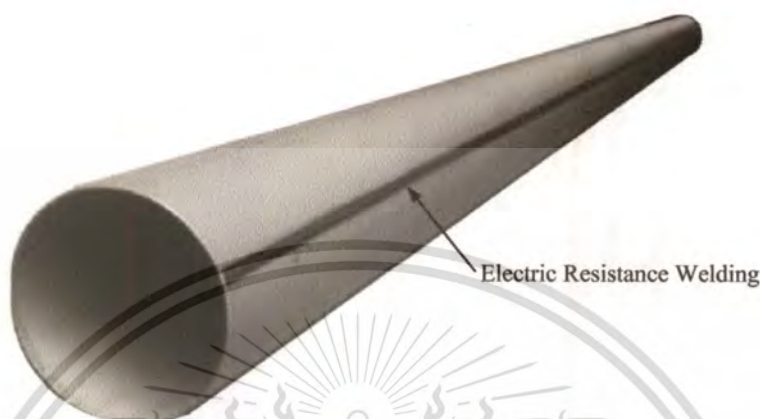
Electric resistance welded pipe process. (PIPING HANDBOOK, 2000)
